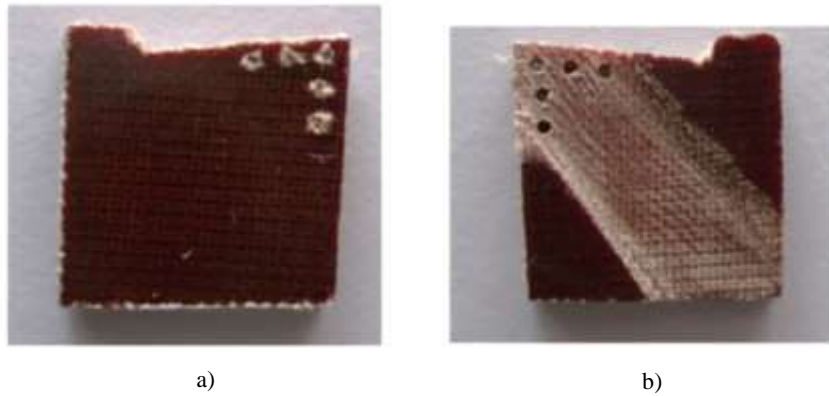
Insulating Plates of Celeron: a) Front Side or Tool Side Face b) Back Side or Tool Holder Face
